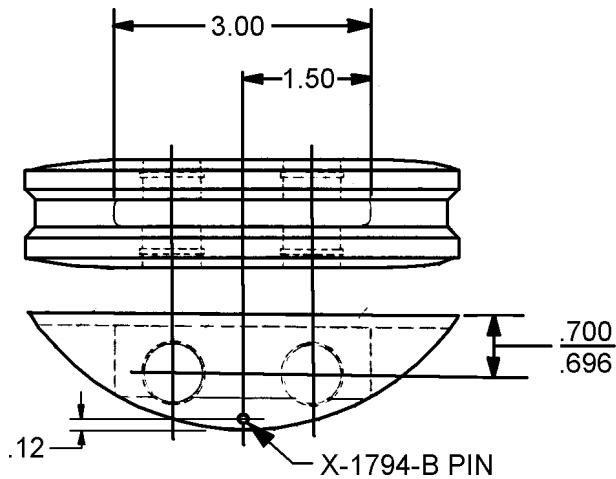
B. 531017 COUNTERWEIGHT ASSEMBLY MADE WITH 530865 COUNTERWEIGHT AND 531016 BUSHINGS
